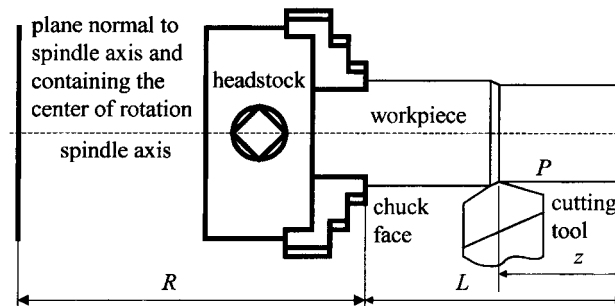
Workpiece set up and rotation center of chuck/headstock assembly in cylindrical turning.
